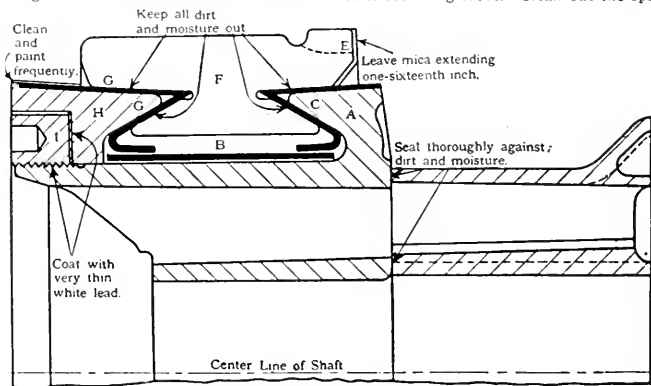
SECTIONAL VIEW OF COMMUTATOR.
